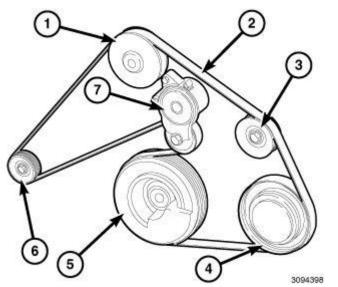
Pulleys, Tensioner & Drive Belt Routing Courtesy of CHRYSLER GROUP, LLC
